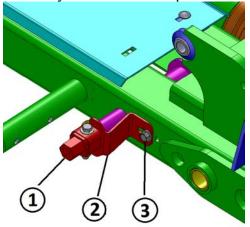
Tension Indicator (ref) Key 1 – Lock Key 2 – Adjuster Key 3 – Lock Bolt
